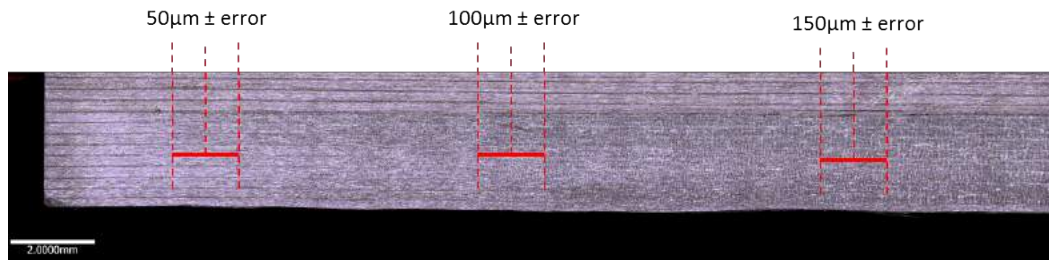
Location for surface roughness measurement on machined surface; error on depth of cut location not to scale.
